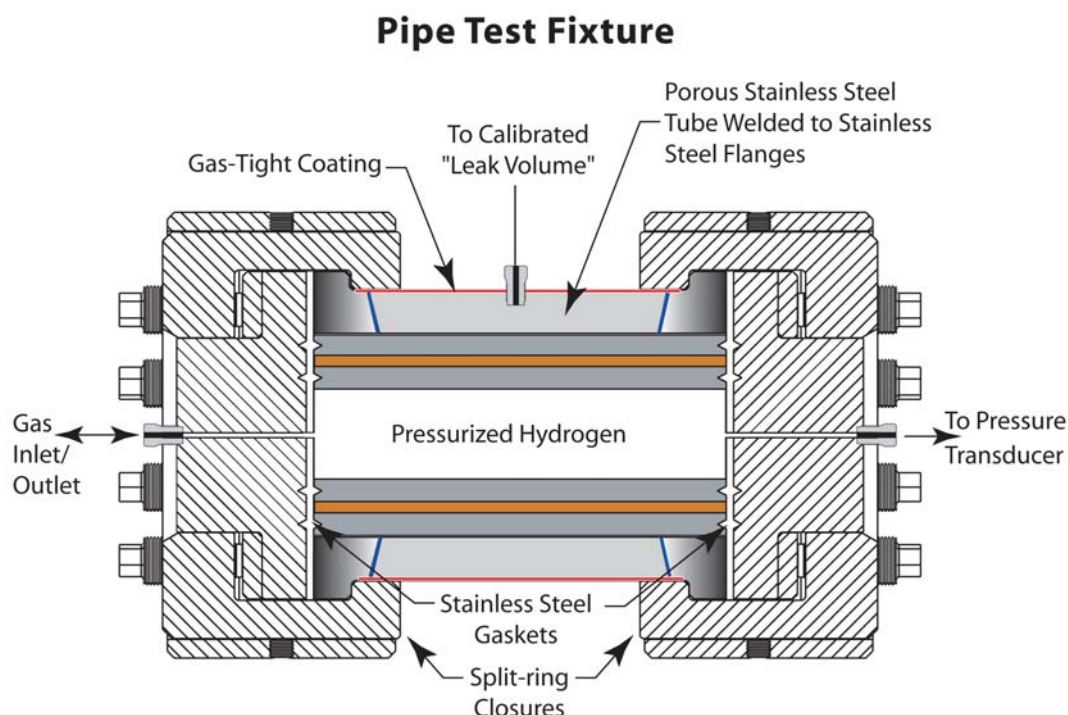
Multi-layer polymer and polymer/metal tube/pipe test fixture.
